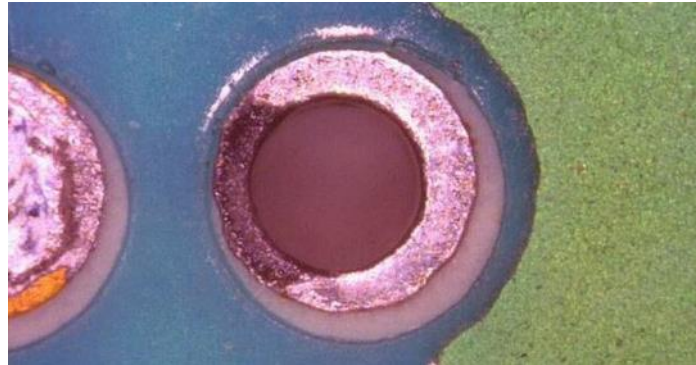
Black pad defect on an ENIG coated PCB<sup>[20]</sup>.
